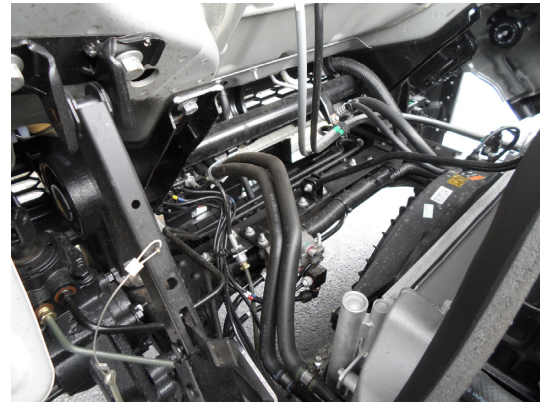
Tubes, hoses, and cable harnesses under the cab of a commercial truck.
